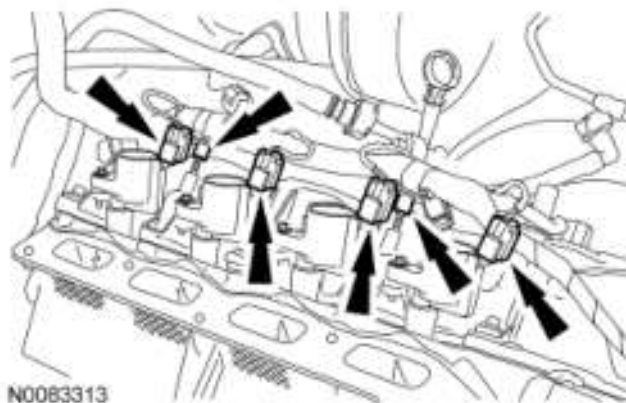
Locating Ignition Coil Electrical Connectors And Wiring Harness Retainers
